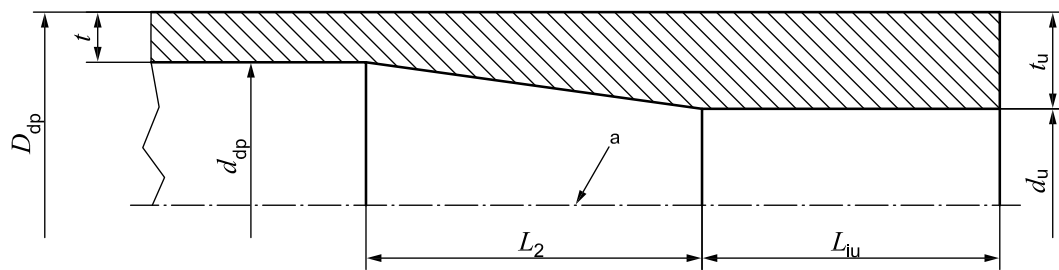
Aluminium alloy drill pipe with external upset and protector thickening
